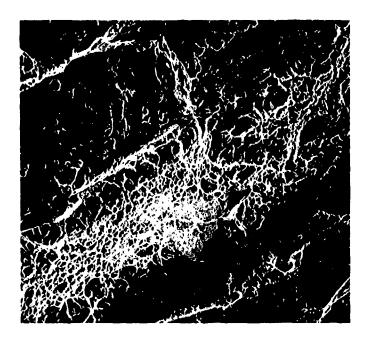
Tensile overload region of the fracture surface of A-514 weldment, 675x.
